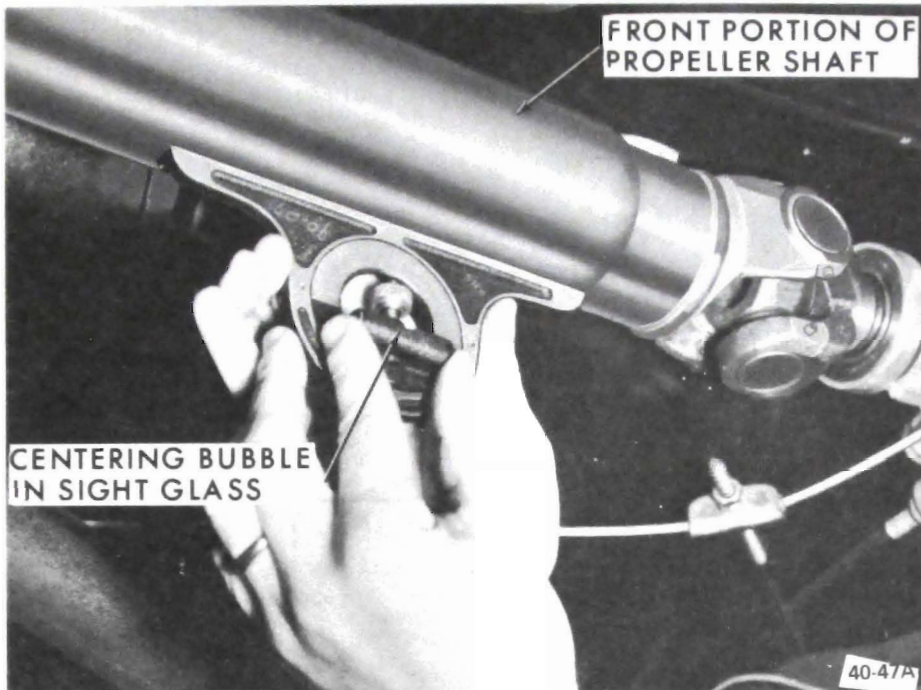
Measuring Angle at Front of Propeller Shaft
